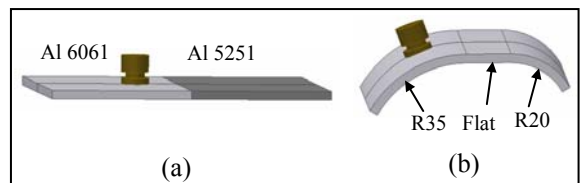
FSW workpieces of (a) flat plate with changing material and (b) Al 6061 plate with changing curvature.
